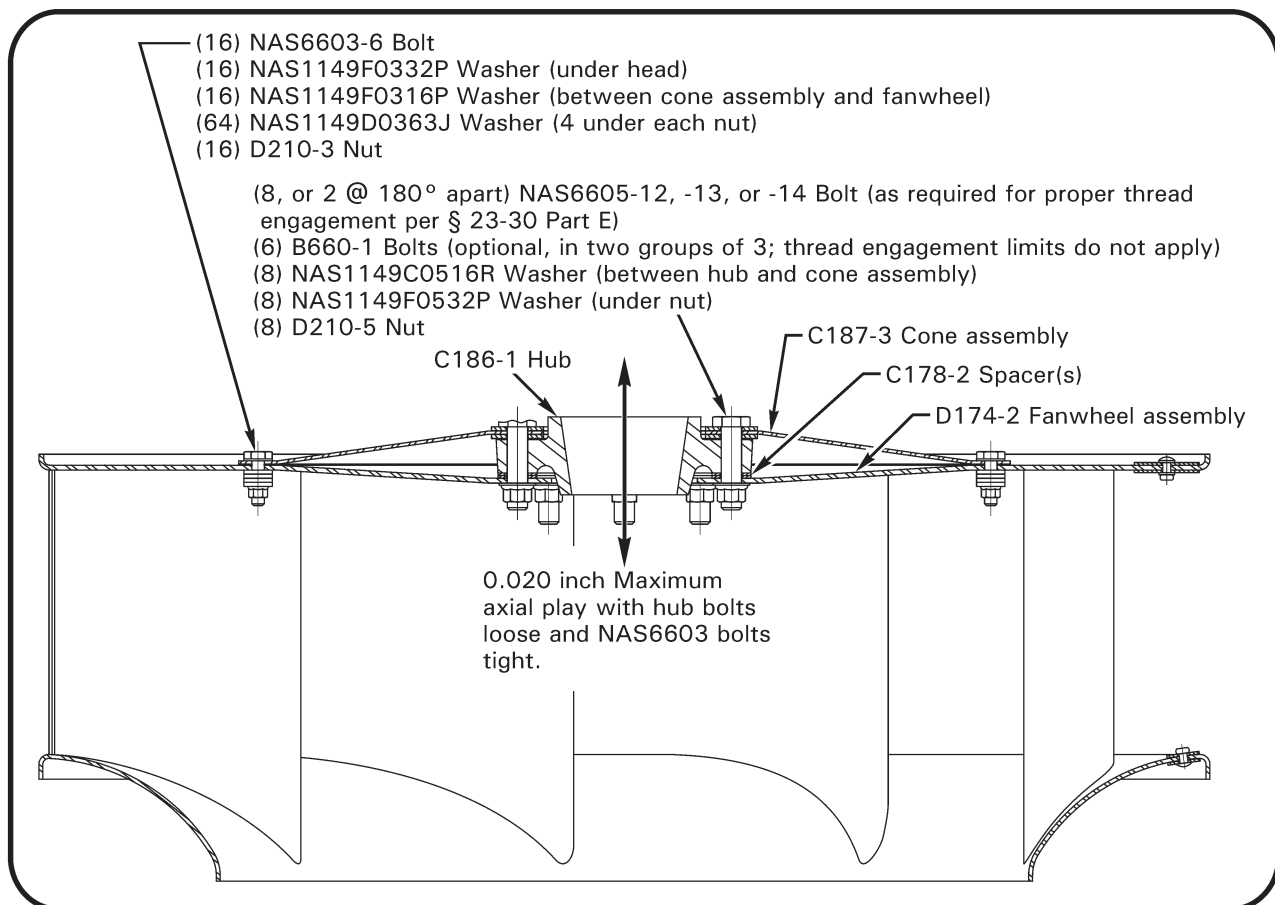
D174-2 FANWHEEL ASSEMBLY
